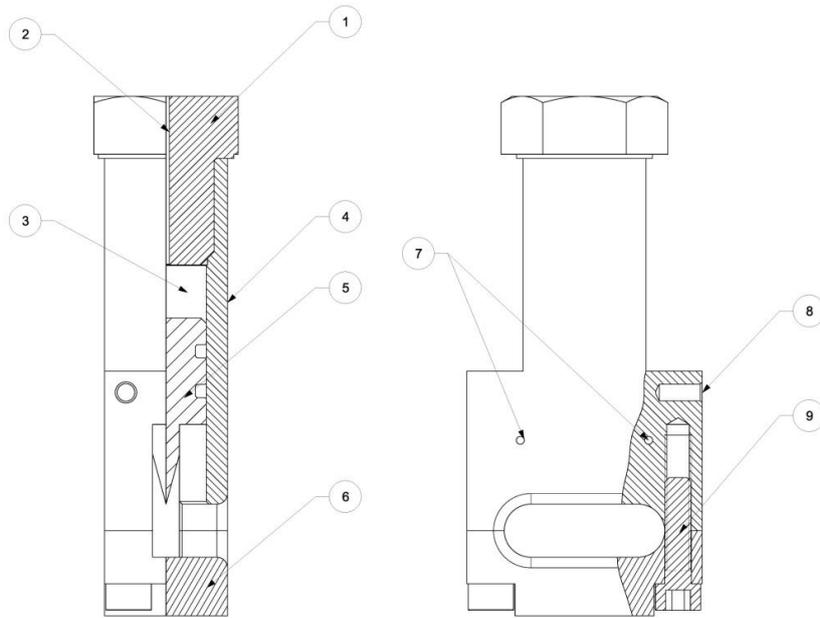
Scheme of designed riser cutter. 1 – plug, 2 – igniter channel, 3 – chamber, 4 – body, 5 – cutting knife, 6 – base, 7 – braking pins, 8 – mounting hole, 9 - connecting bolt.
